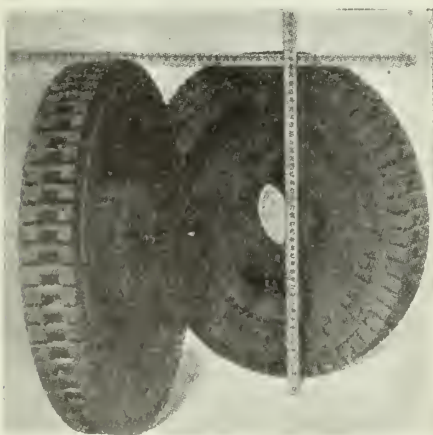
EXAMPLE OF LARGE MALLEABLE IRON CASTING
